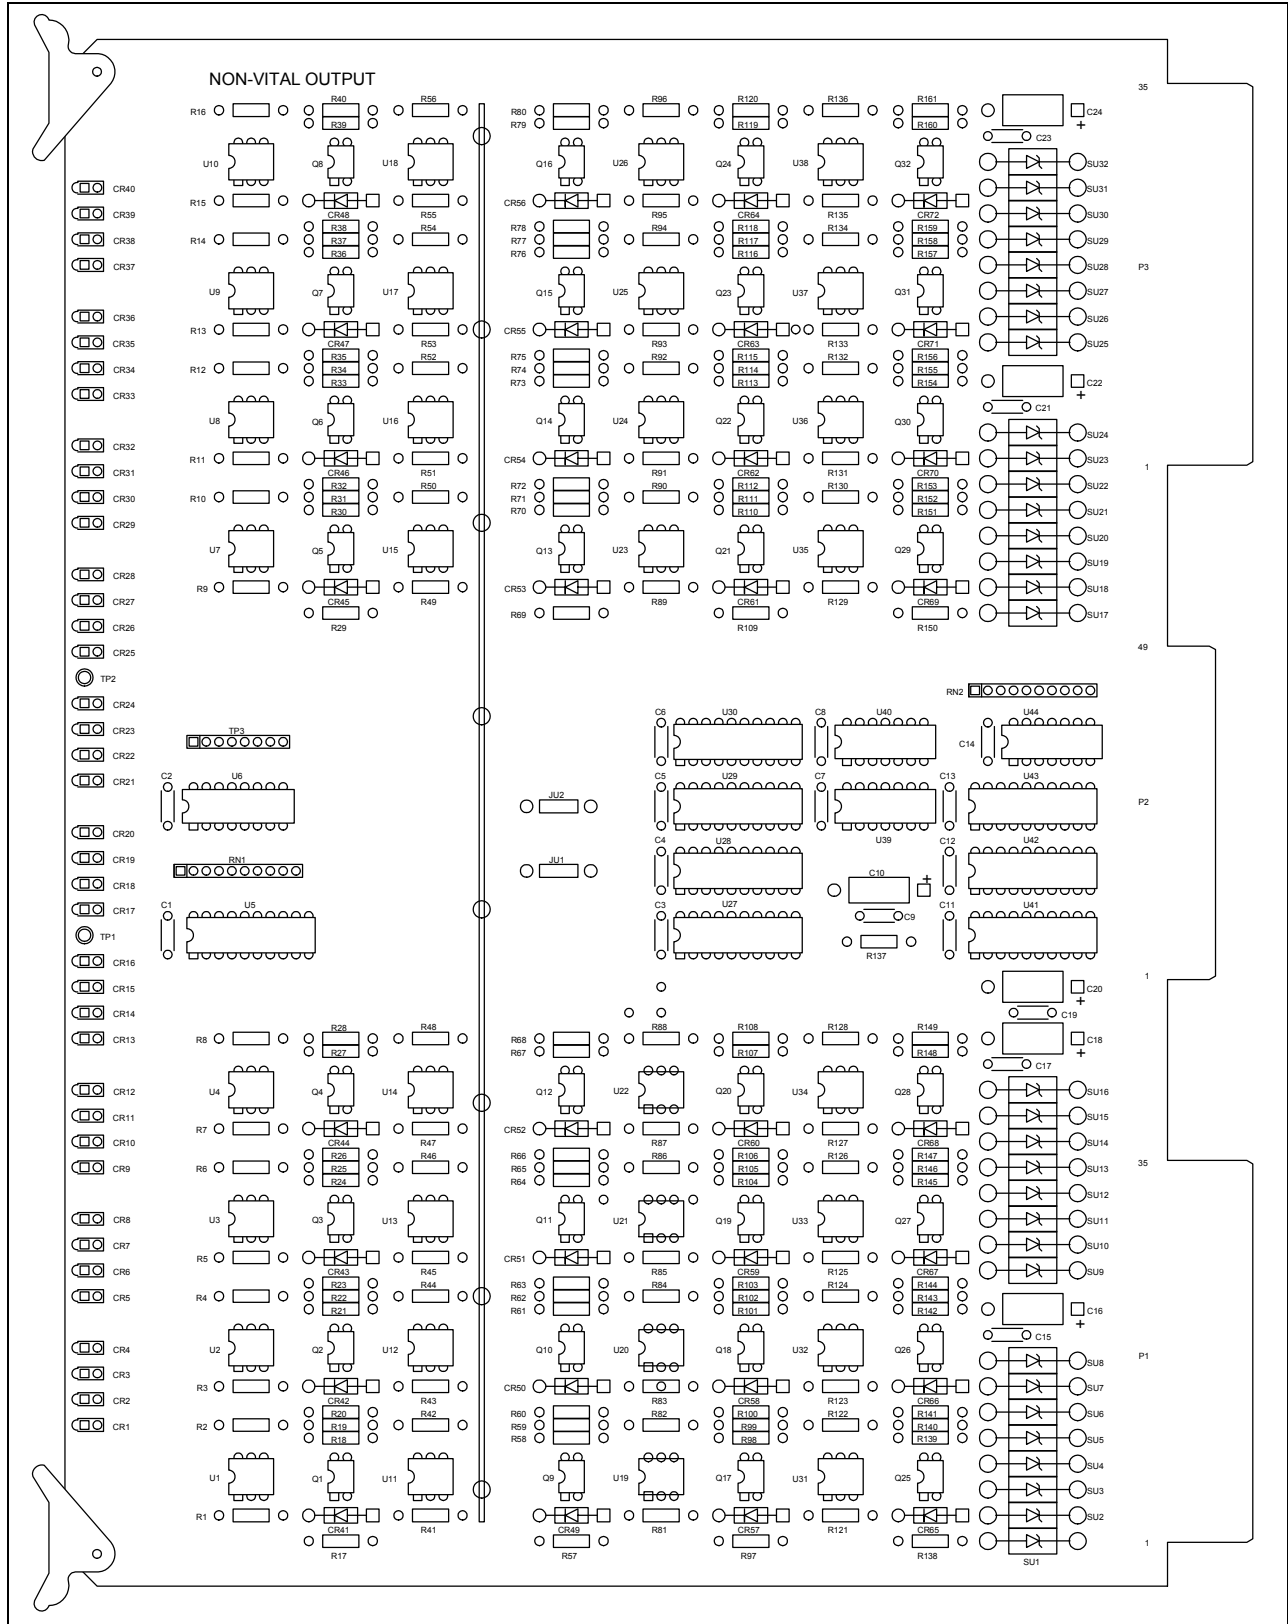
NVO-SNK Board, P/N 31166-123-00
